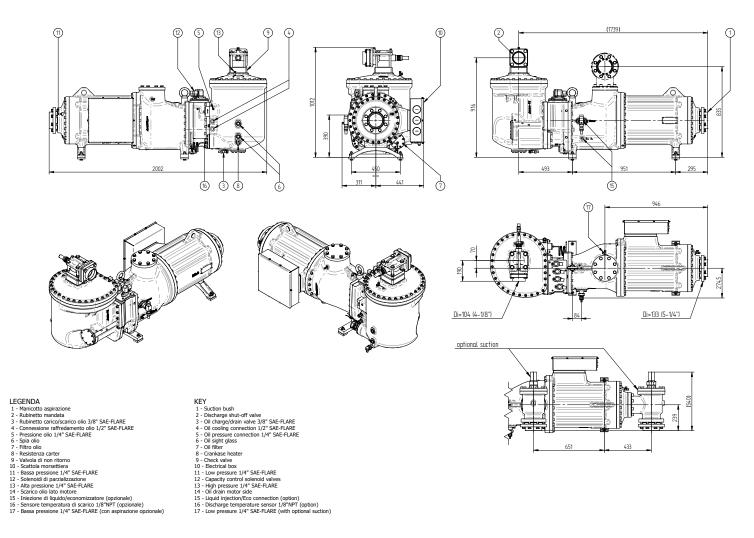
dimensional drawing of the models: RS5-L210/L240/H270/H300 (drawing code: MSI386-AA);
